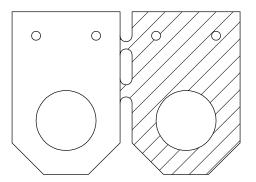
SPLITTING APART THE GUIDE BRACKETS
